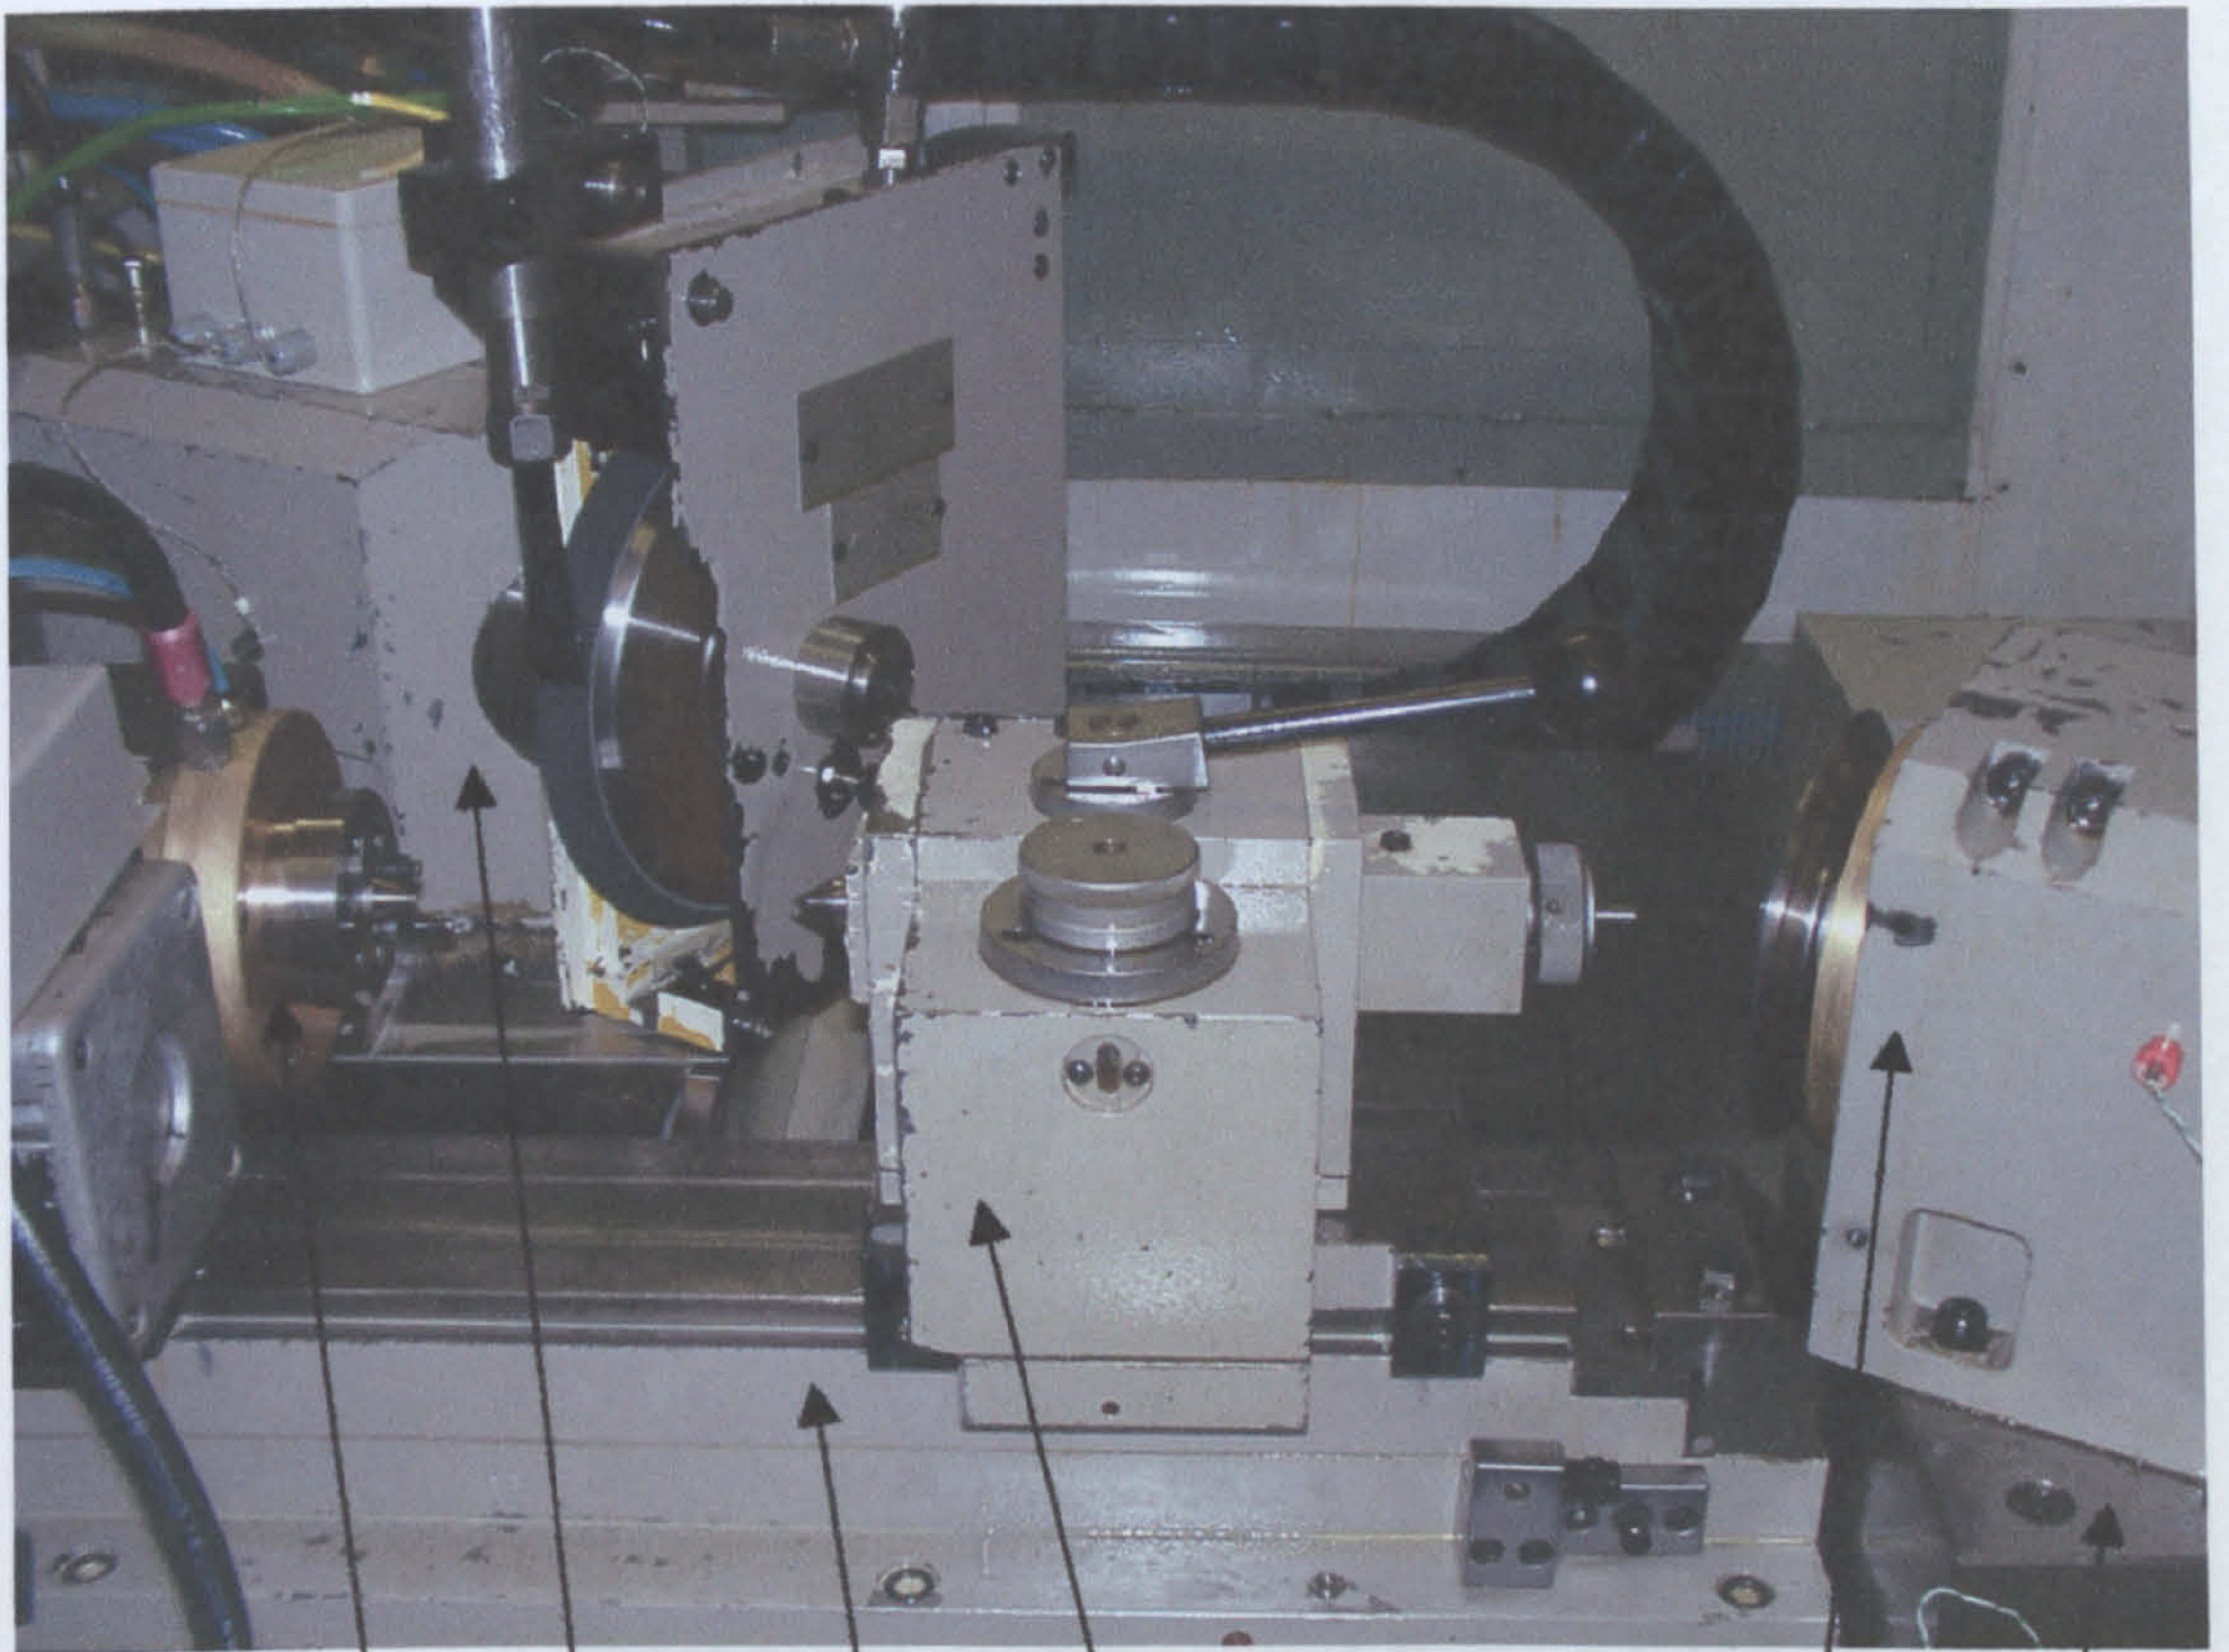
Photograph of the Suprema high-speed precision grinding machine.
